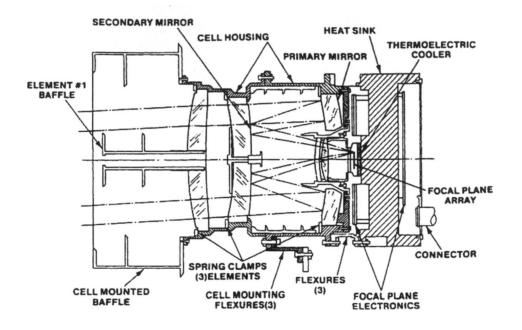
Sectional schematic view of the star-mapper lens assembly. (Adapted from Cassidy.⁹)
